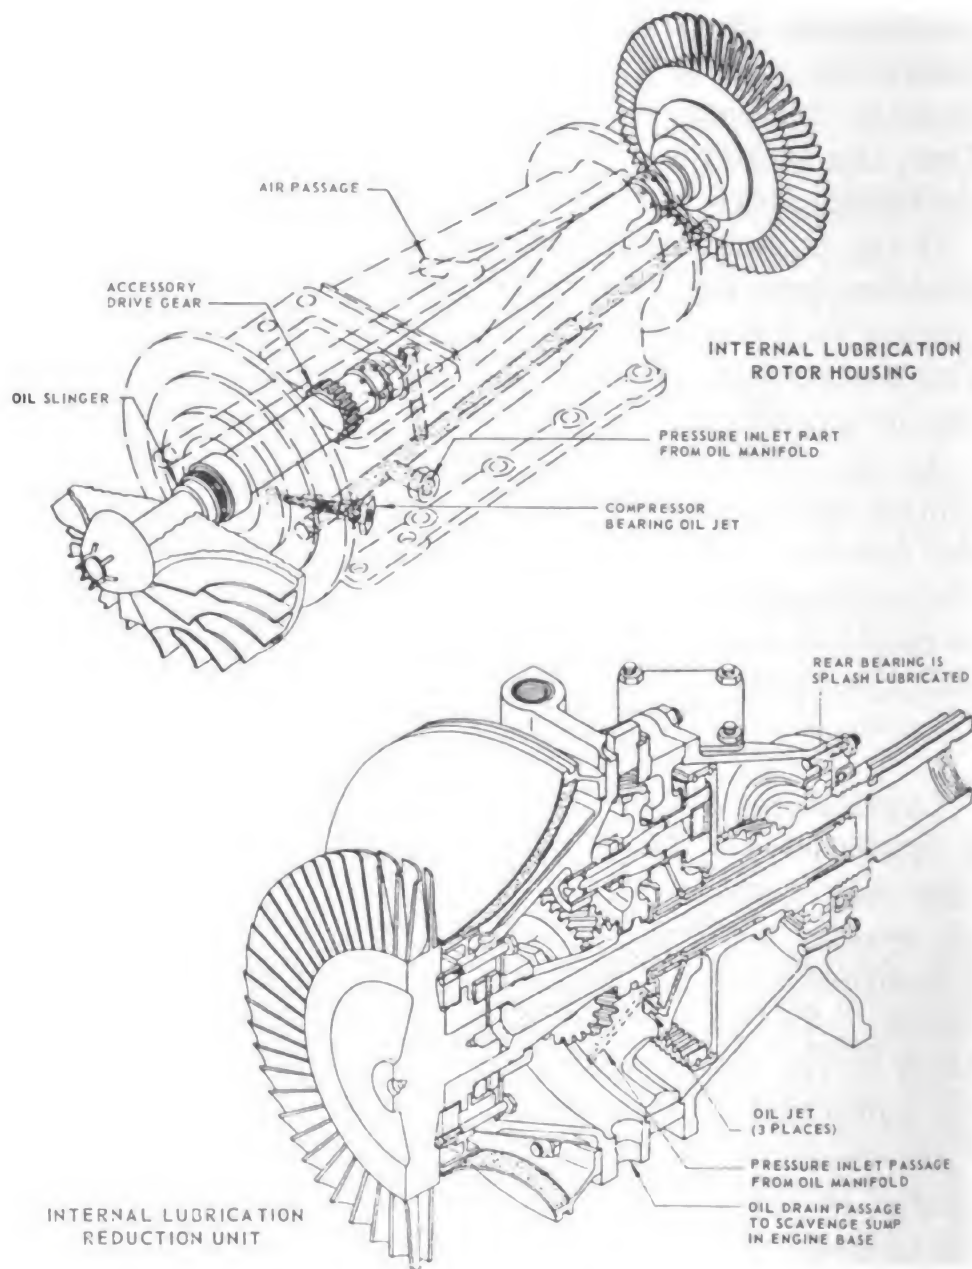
Internal lubrication of rotor housing and engine reduction unit.
